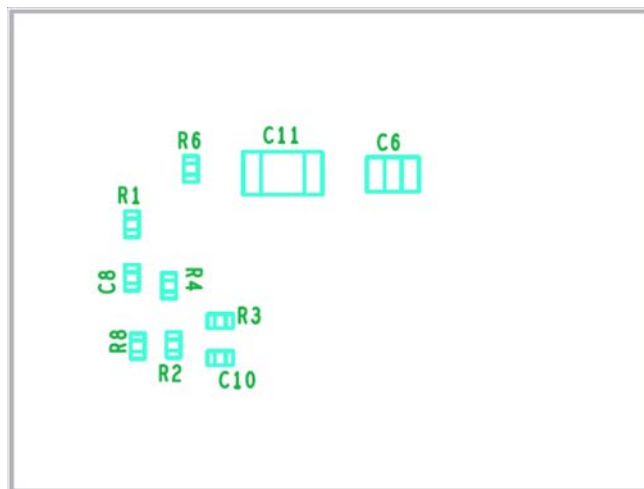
BOTTOM COMPONENT ASSEMBLY (MIRRORED)
